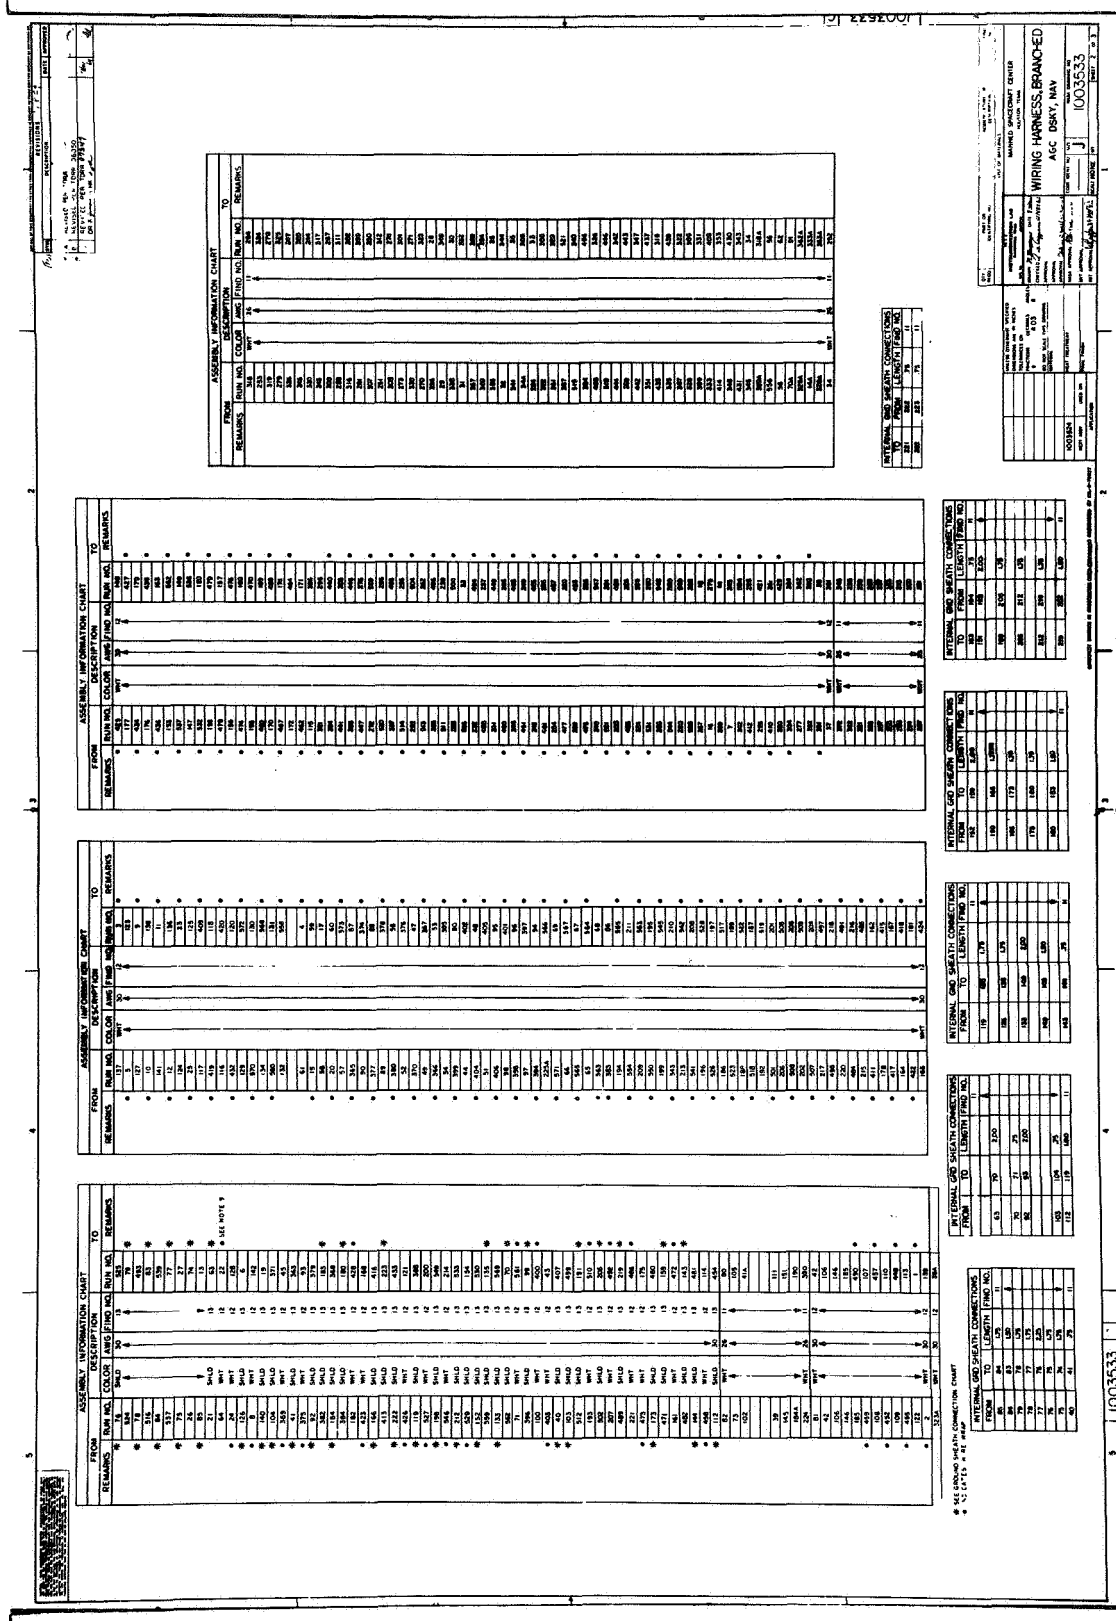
Sample Assembly Drawing, Wiring Harness, Branched (Sheet 2 of 3)
